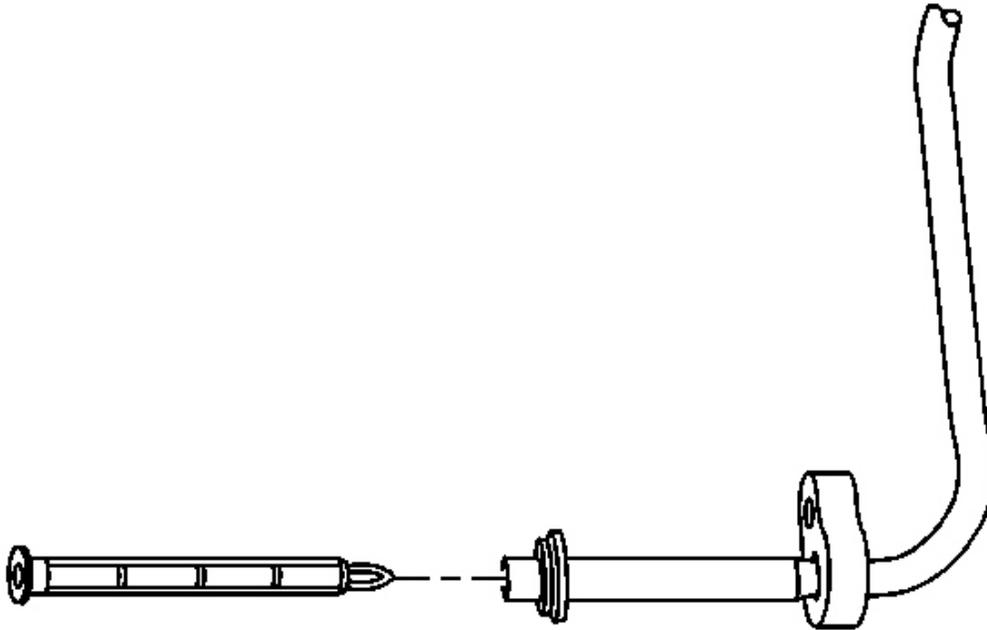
A/C Refrigerant Filter & Front Evaporator Inlet Line
